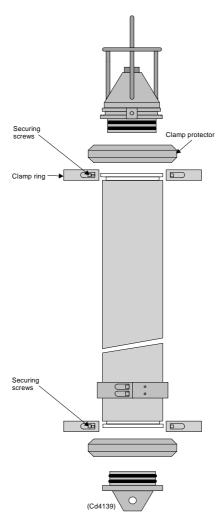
Example of a basic aluminium transponder pressure housing assembly
